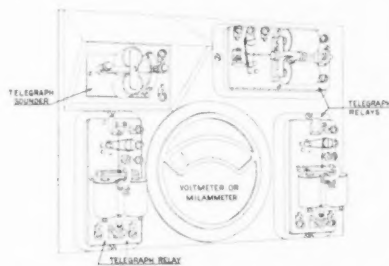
Typical Assembly of Apparatus Panel for Panel Mounted Test Board
